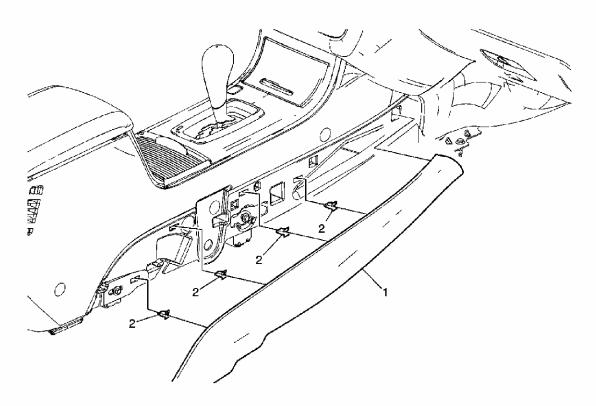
View Of Console Trim Panel - Right Courtesy of GENERAL MOTORS CORP.
